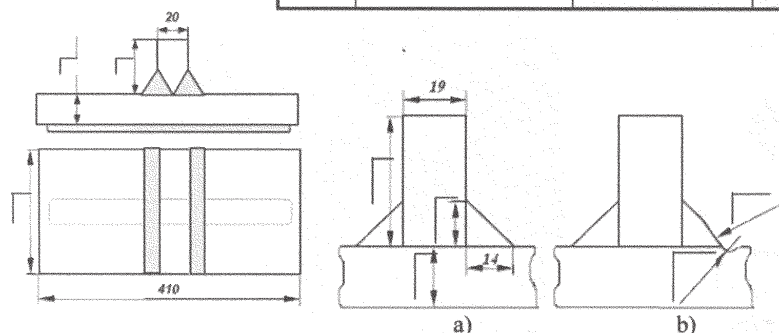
Samples of welded joints: a - before treatment, b - after UIT [21]
